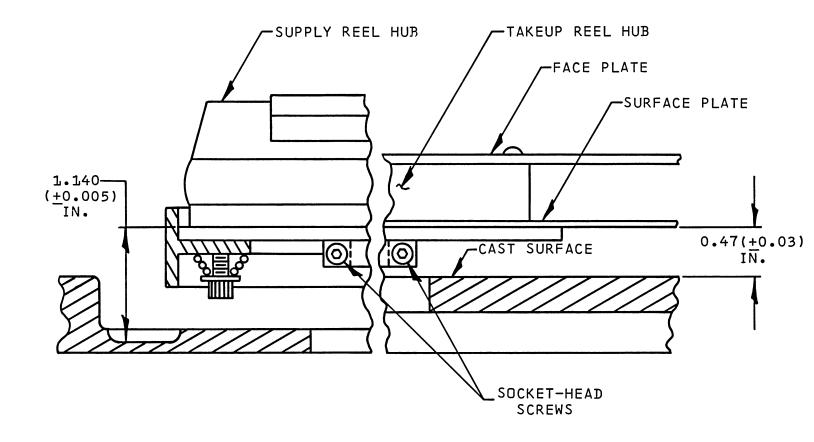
Reel Hub, Showing Adjustment Dimension
